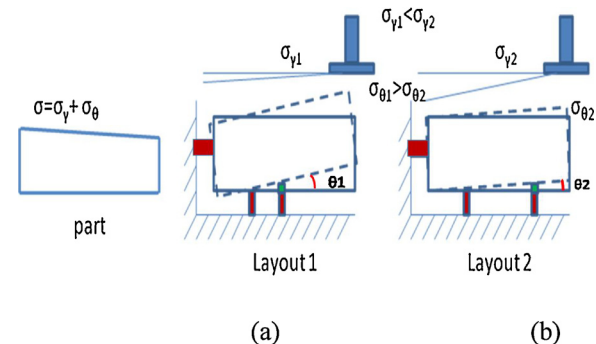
Impact of fixture layout on tolerance allocation for a machine tool.
